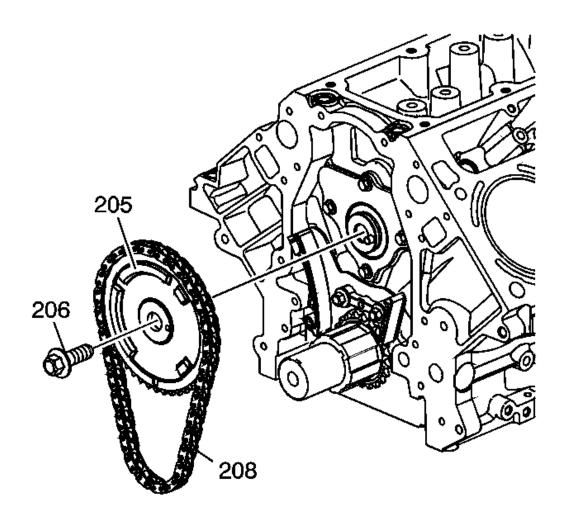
View Of Camshaft Sprocket, Sprocket Bolt & Timing Chain Courtesy of GENERAL MOTORS CORP.
